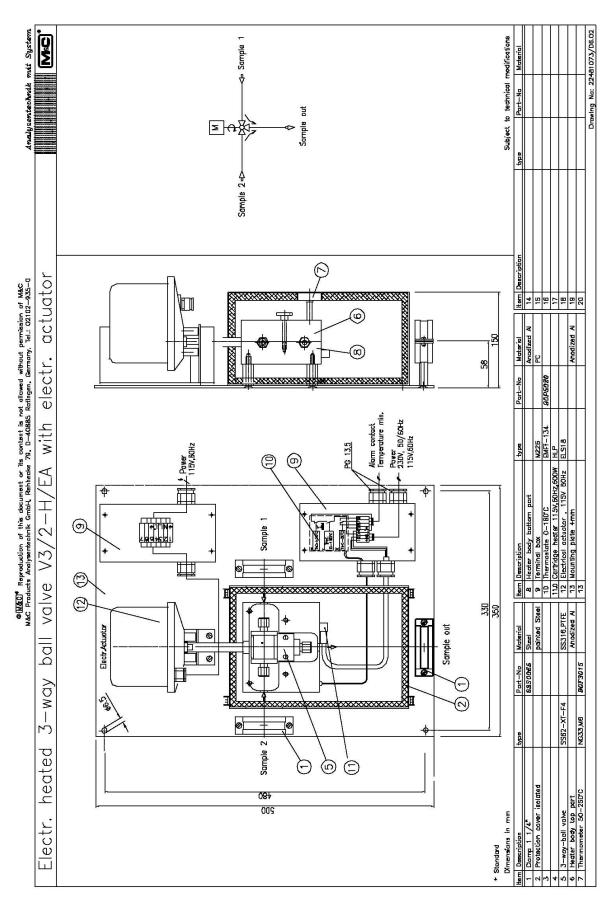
Electrically heated 3-way ball valve V3/2-H/EA with electrical actuator
